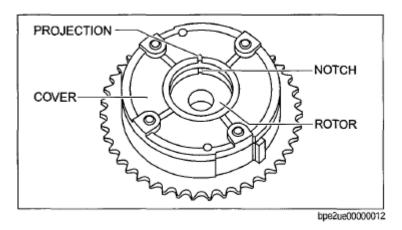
Identifying Hydraulic Variable Valve Timing Actuator Rotor, Cover, Projection And Notch
